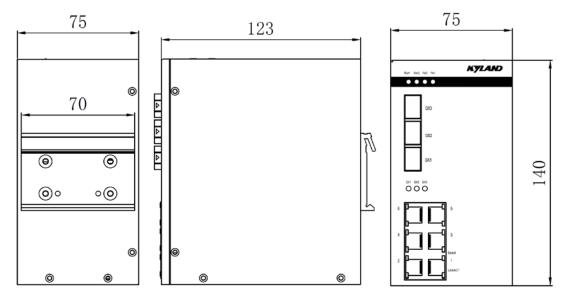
Dimensions for SICOM3000BA (integrated device, DIN-rail mounting)
